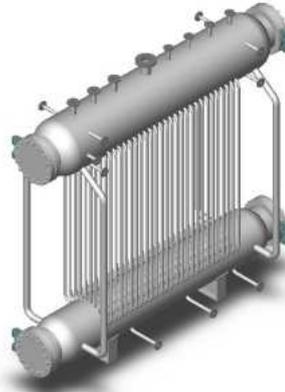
Typical construction of a waste heat boiler tubing with steam drums (Envirokinetics)
